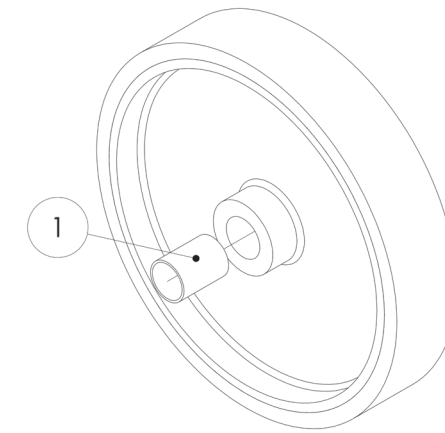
HB-1030/1430 Front Wheel Subparts
